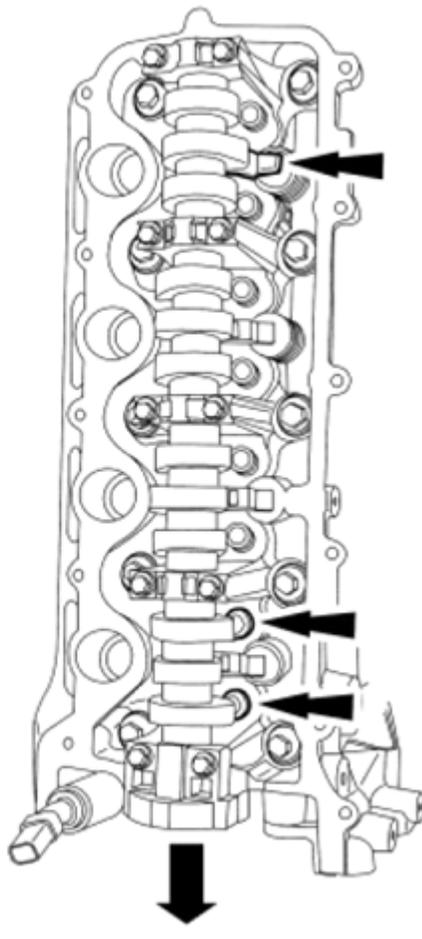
Locating Cylinder Head Camshaft Roller Followers
